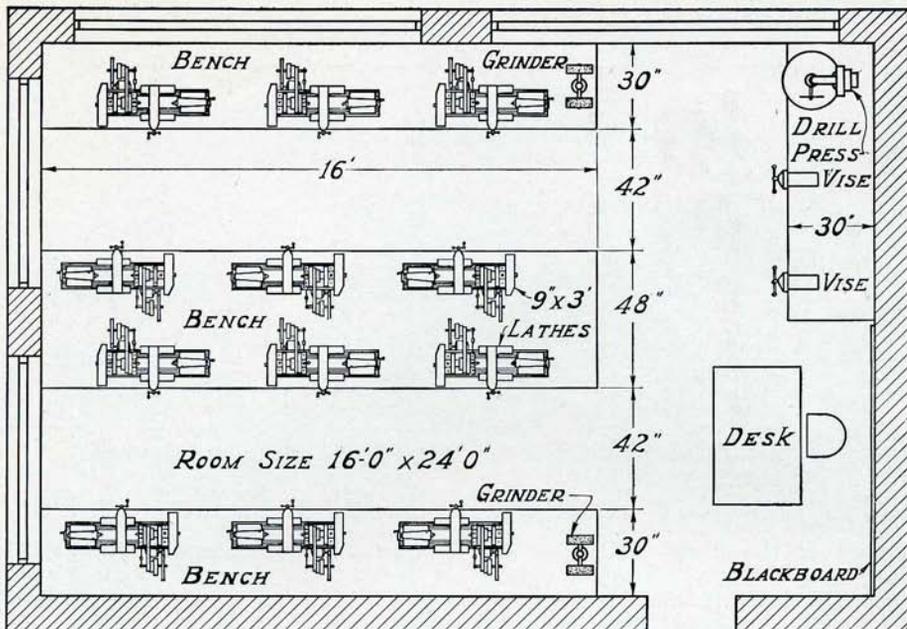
Floor Plan of School Shop 16'x24' with Twelve Motor Driven Lathes
